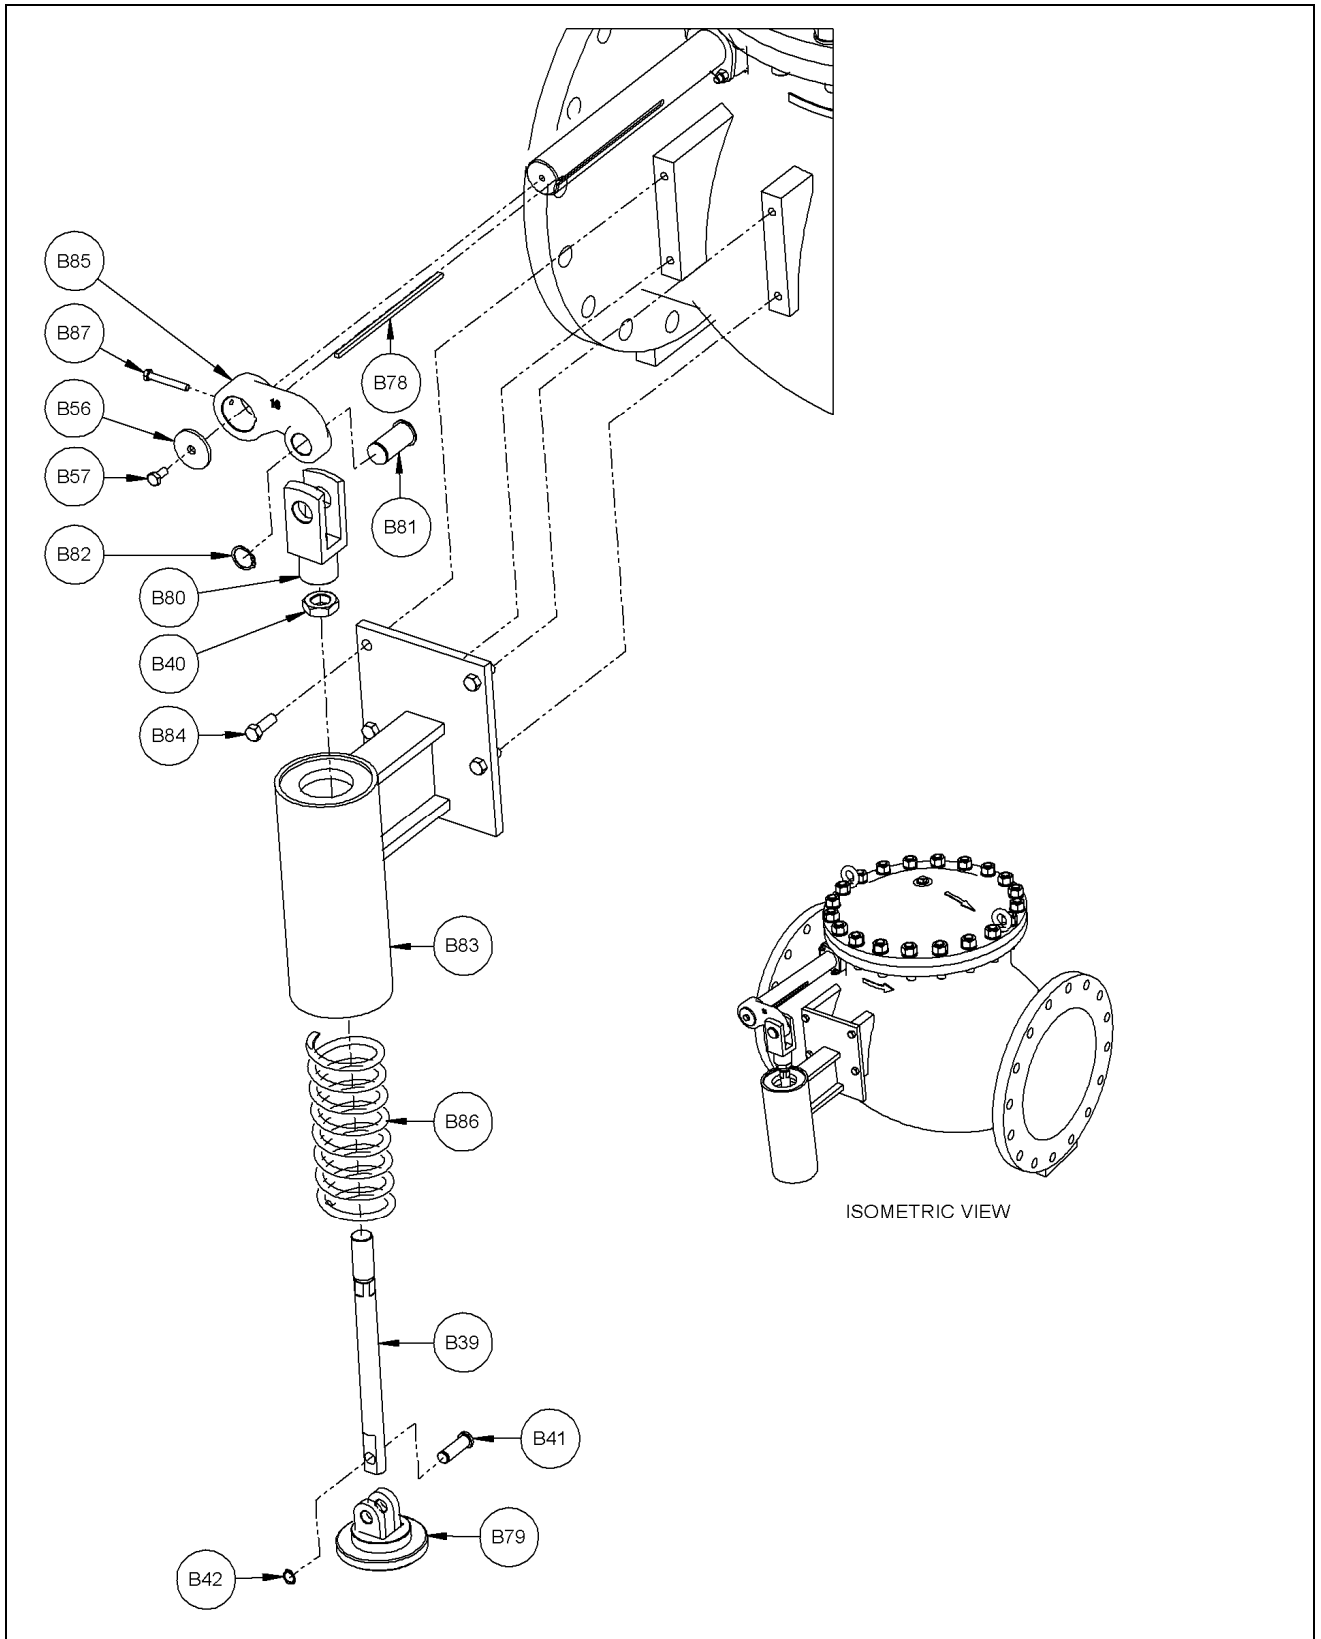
CVS-EDV Swing Check Valve (Lever & Spring 16-30'')
